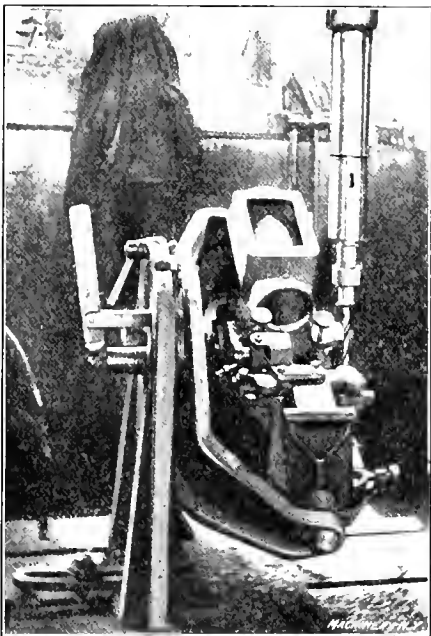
Fixture Indexed for Drilling Bearing-cap Holes
